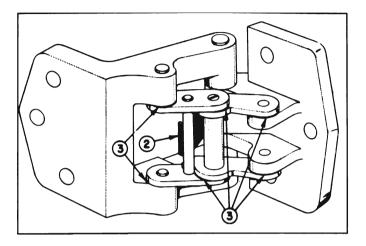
Lubrication of Rear Door Hinge and Hold-Open Assembly—Series 40-60
